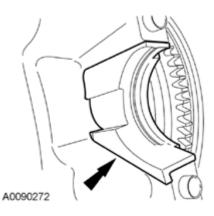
Locating Starter Motor Isolator Courtesy of FORD MOTOR CO.
